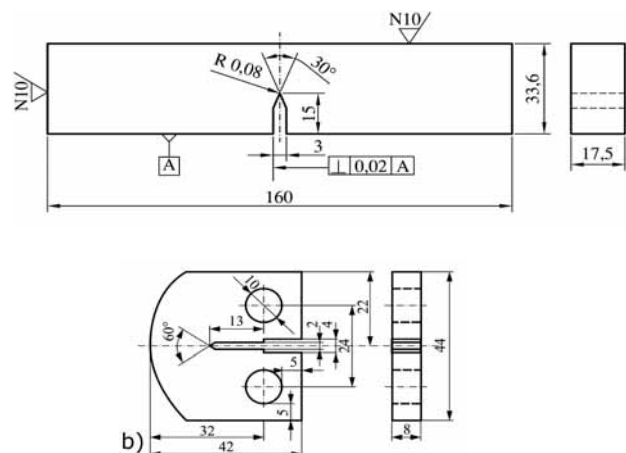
Specimen for fracture mechanic testing: a) SEN-B specimen, b) CT specimen
